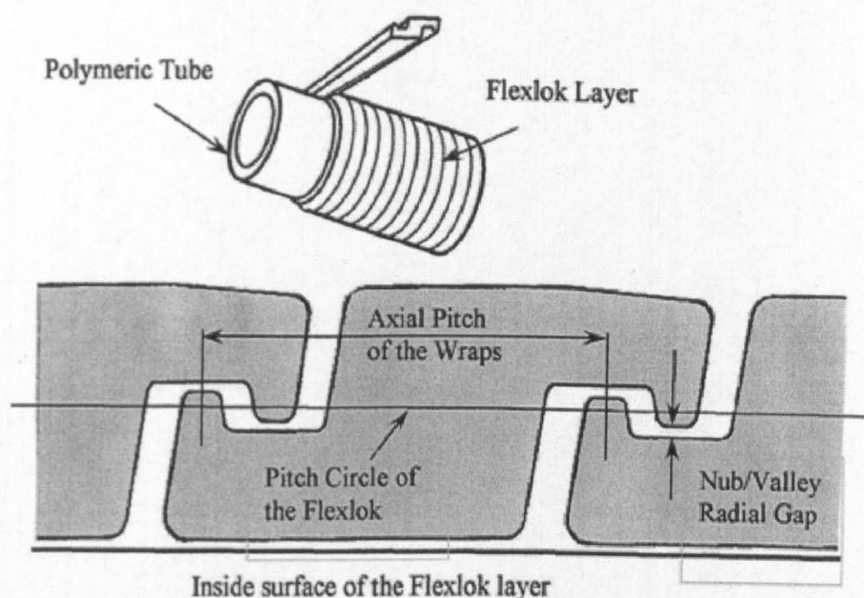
Pressure armour wire winding and interlocking mechanism
